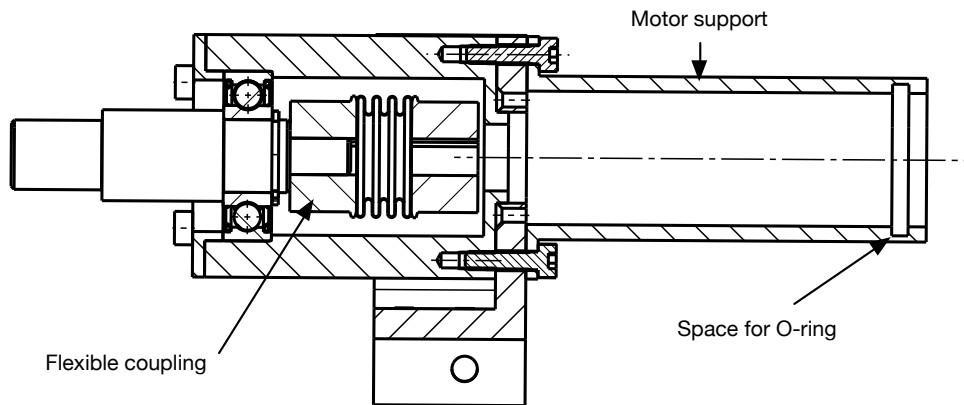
Assembly drawing of the corrected design for the mounting of the rotation motor
